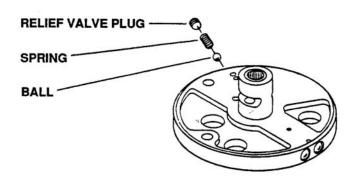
Removing Relief Valve Plug Spring and Ball
